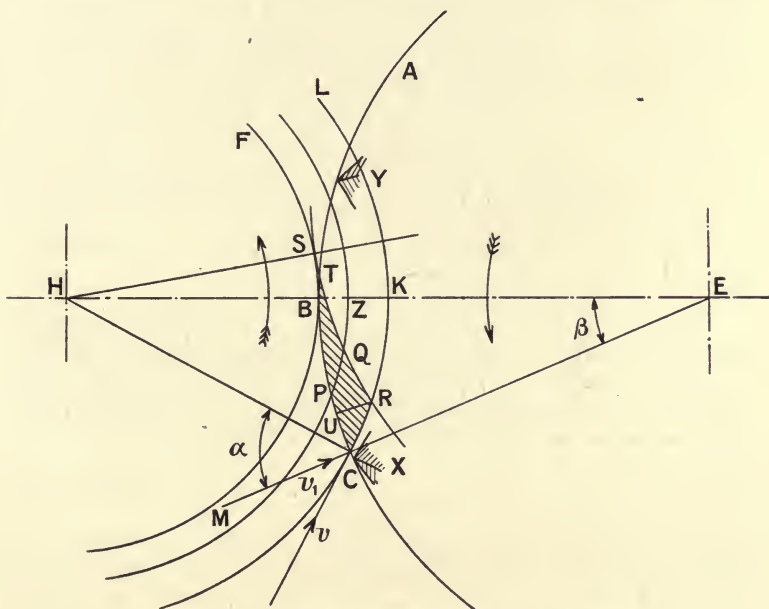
FORMATION OF CHIP BY DISC WHEEL
